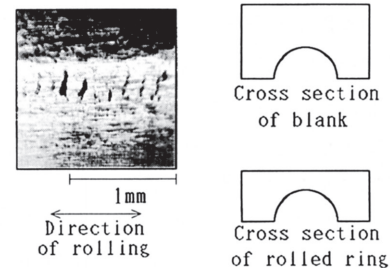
Cracks on bottom of ball-channel using machined blank.
